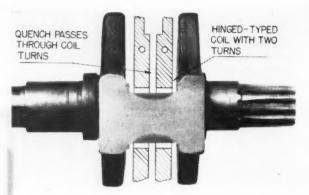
An etched section of a hardened crankshaft bearing area and a two-turn coil which is used for heating.
